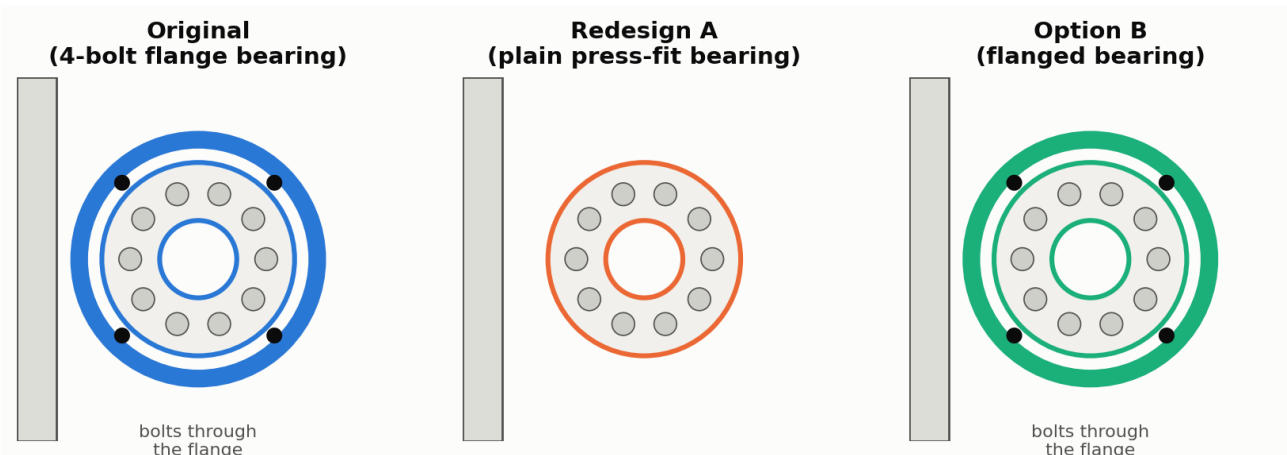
The original bolted its bearings flat to a wall through a ring of small bolt holes. The first redesign switched to a plain press-fit bearing (still a perfectly good bearing, just a different family). Option B keeps the bolt-on flange, just at the smaller bore size the real shafts now need.
